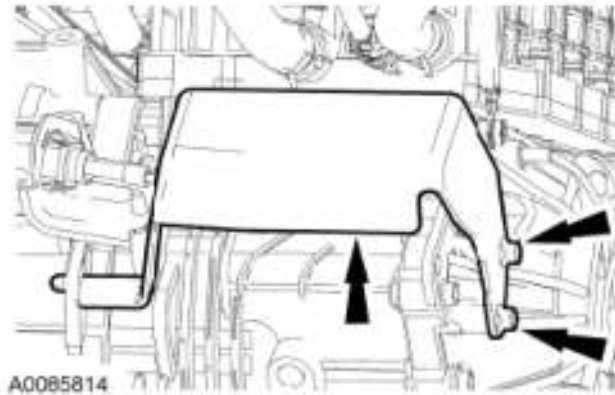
Locating Bolts And Transaxle Control Snow Shield
